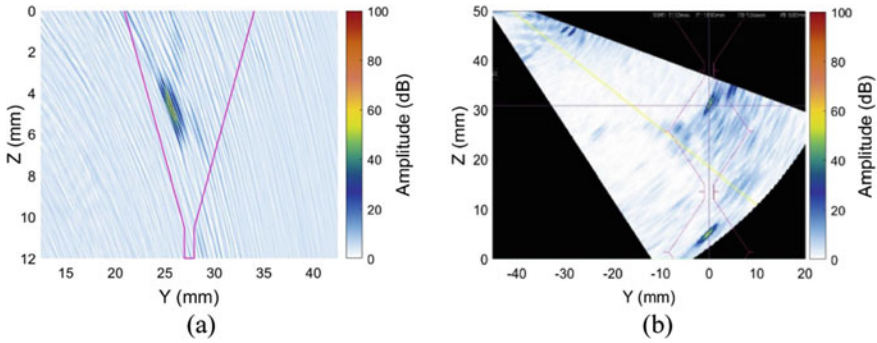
Imaging results of specimen 1 with slag defect: a TFM image, b sector image using cap inspection
